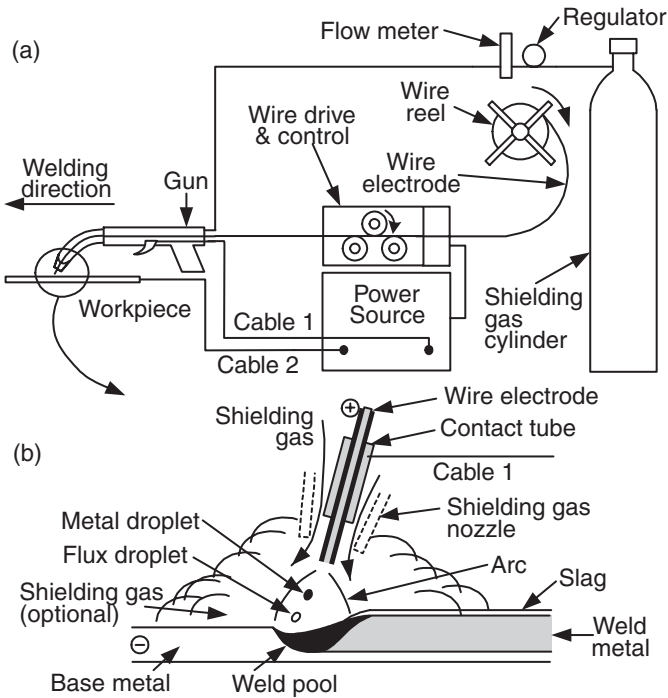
Flux-core arc welding: (a) overall process; (b) welding area enlarged.
